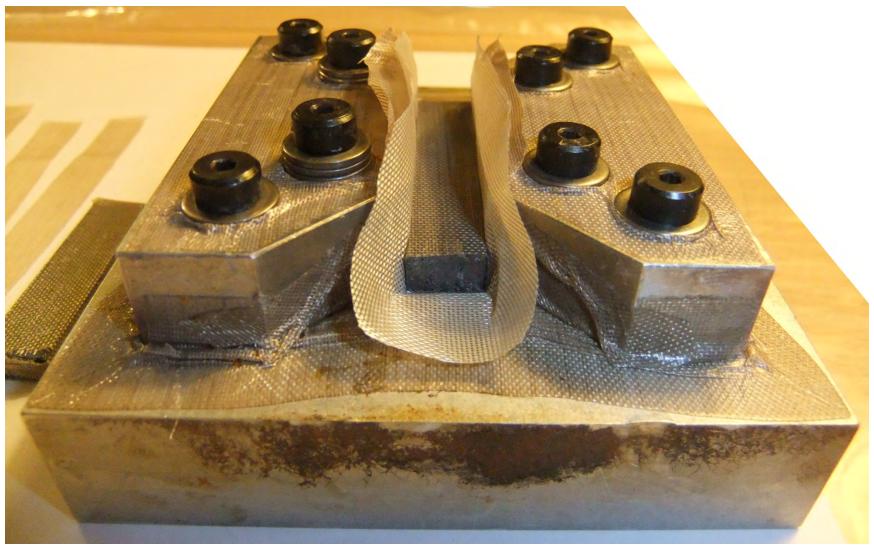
, Bottom Graphite Tooling Plate Insertion Top Side View
